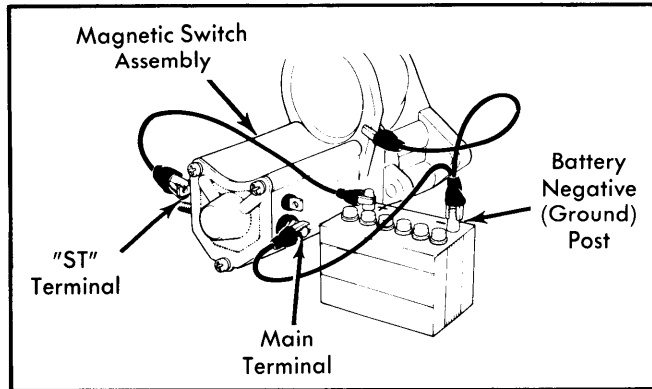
Magnetic Switch Pull-In Coil Hook-Up
